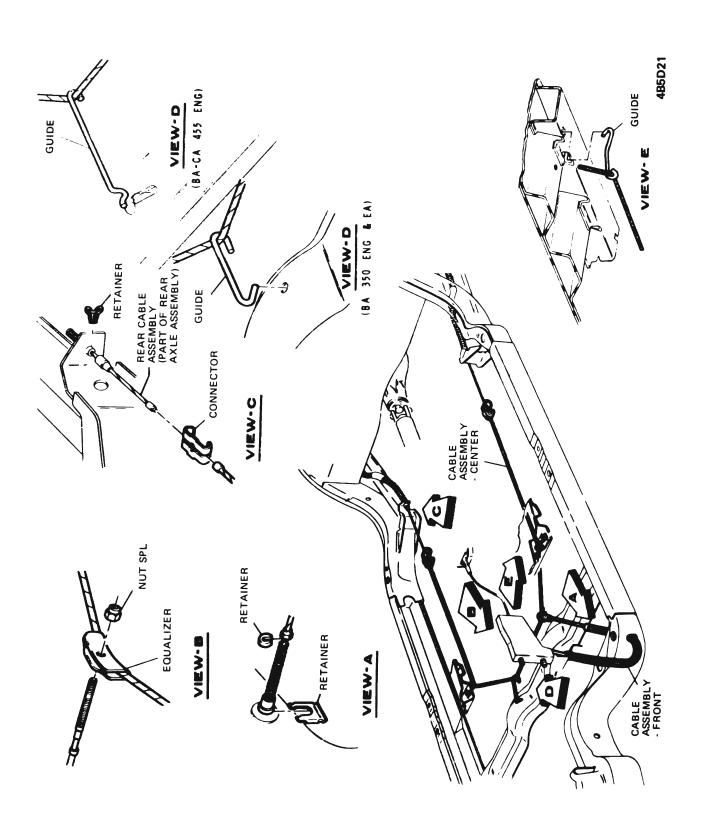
D-21 Parking Brake Cable Assy. - B-C-E Car
